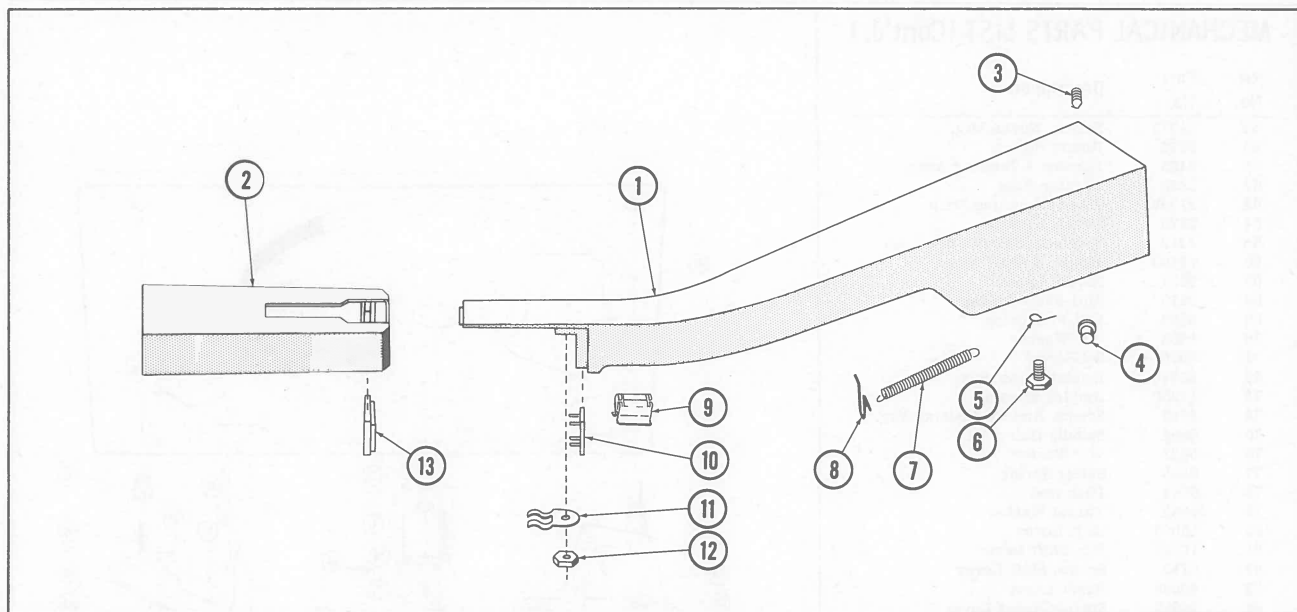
Exploded View of Tone Arm Used in Models 1572 and 1587.
